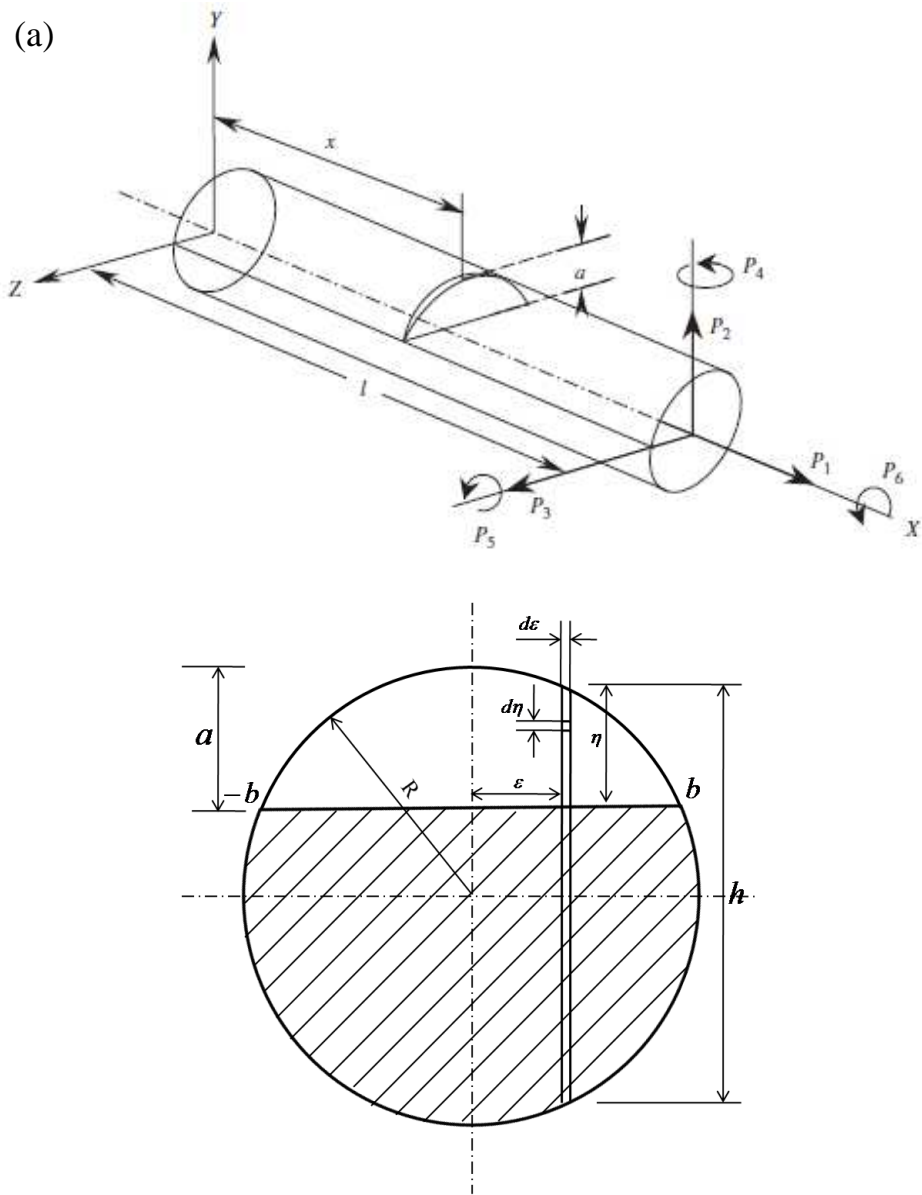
(a) A cracked shaft in general loading [150] (b) Cracked shaft cross-section
